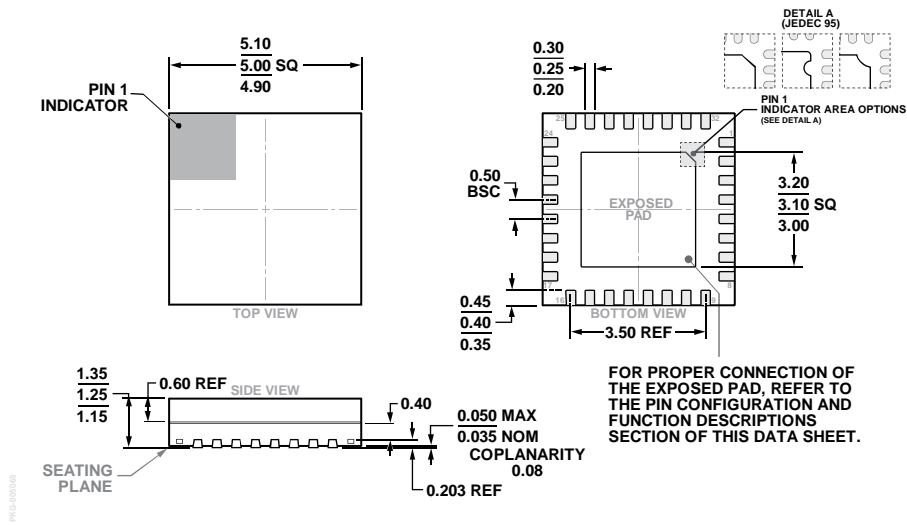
32-Lead Lead Frame Chip Scale Package, Premolded Cavity [LFCSP\_CAV]
